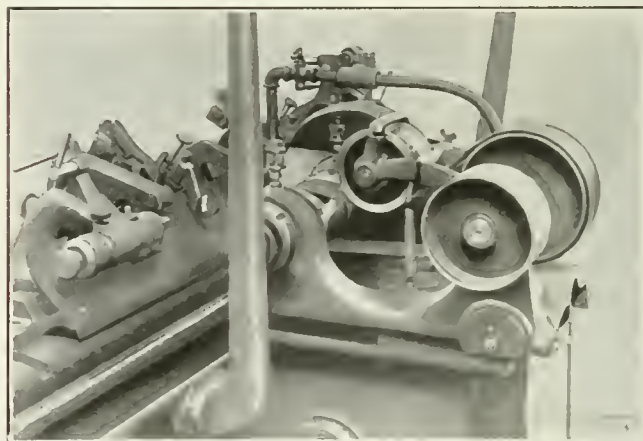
Side View showing Wheel-spindle Drive and Belt Tightener
